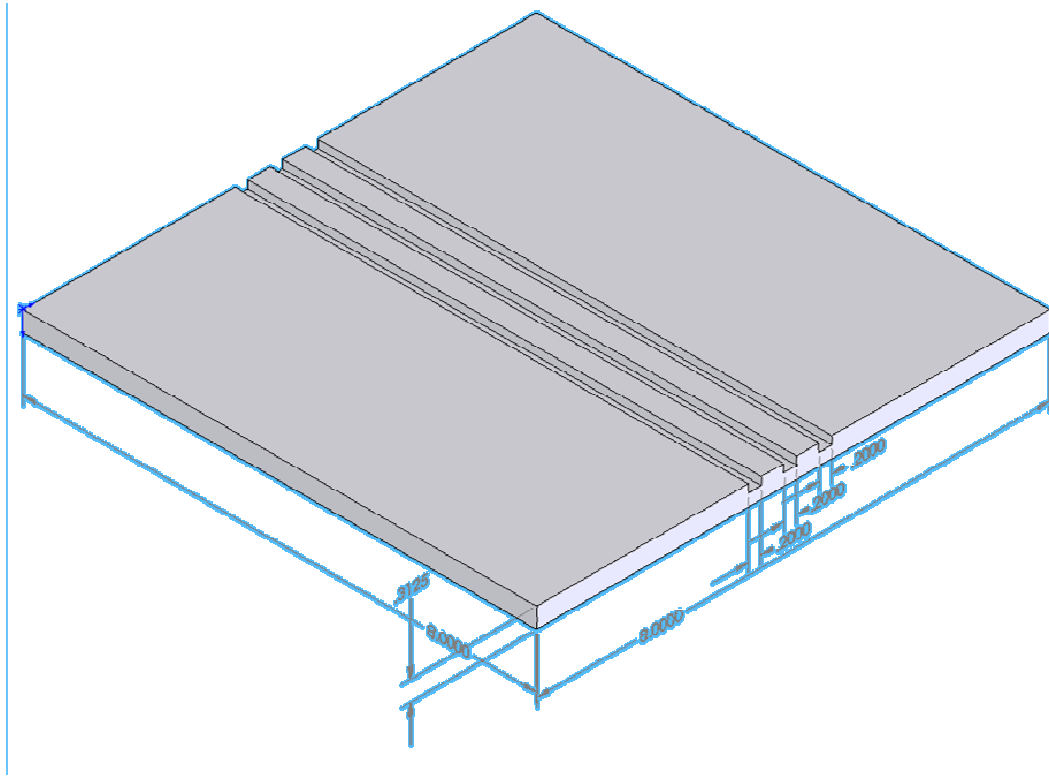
CAD projection of secondary anvil allowing thermocouple probes to exit back of workpiece.
